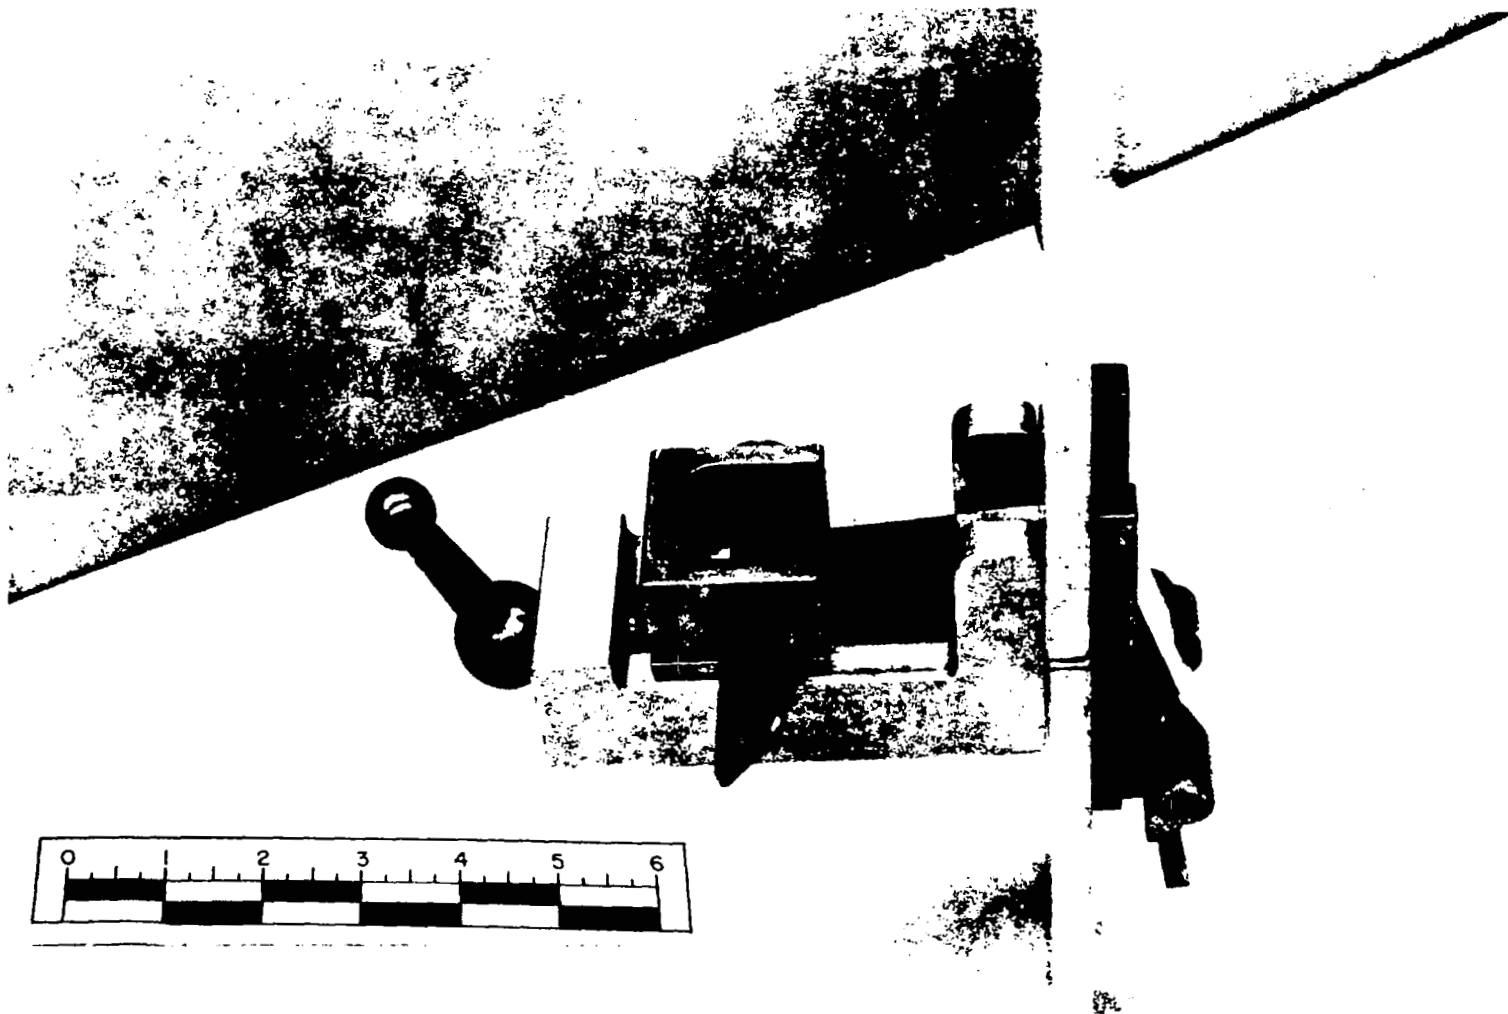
Two pieces of 1/2 inch aluminum plate aligned for welding using local tooling clamp.
